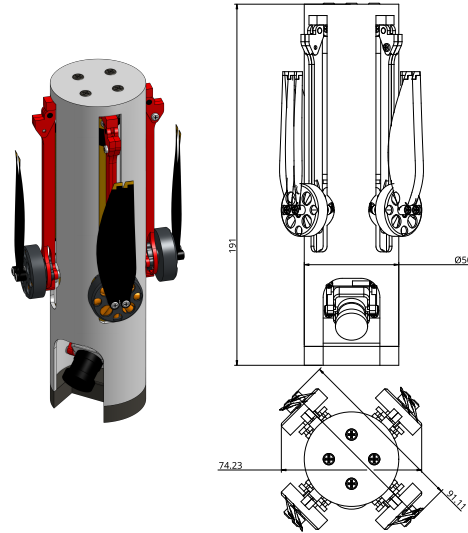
Three-view drawing of quadcopter in folded configuration at maximum operating empty mass (MOEM). Dimensions shown in millimeters.
